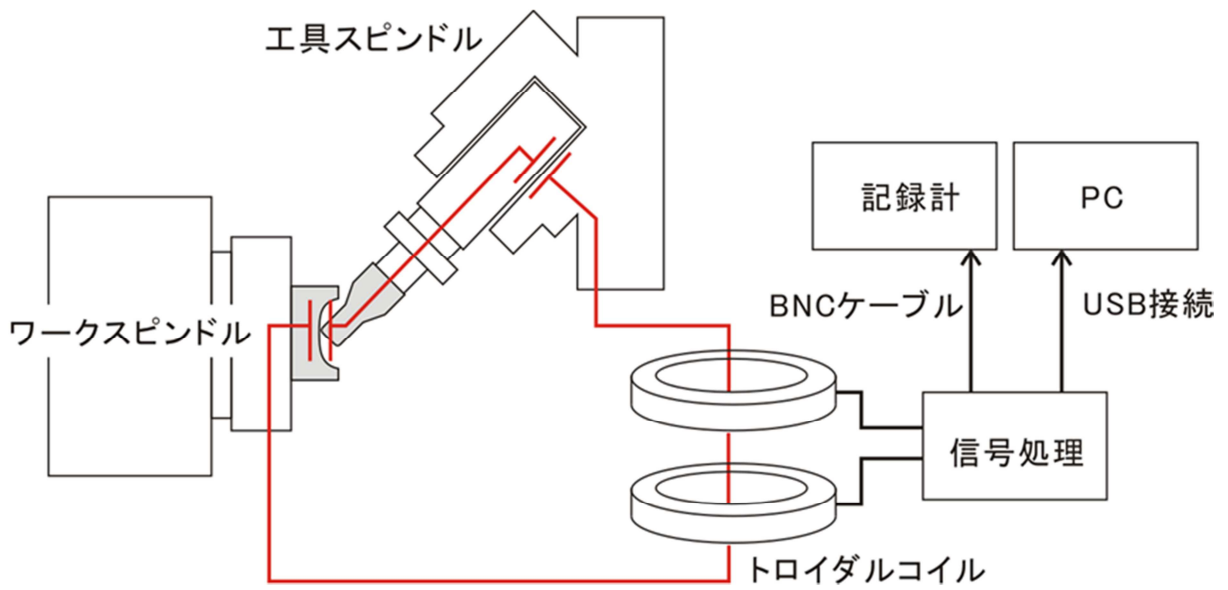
Schematic illustration of touch sensing system for gas bearing in spindle ⁴⁻²⁾
